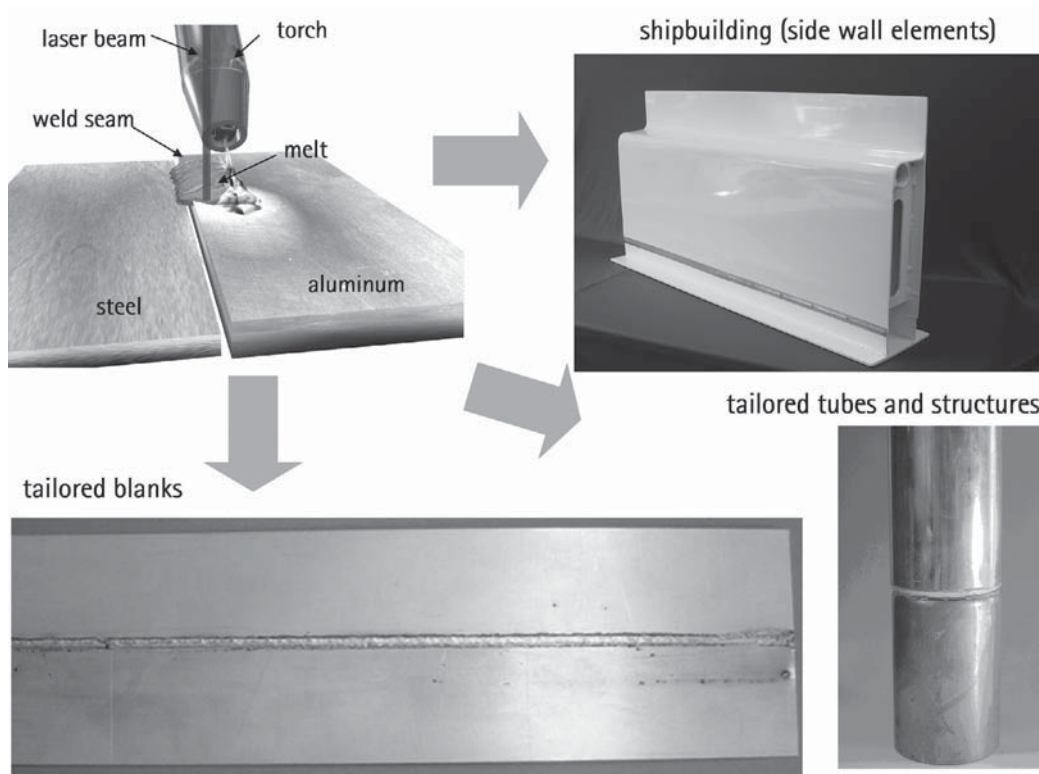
Process set-up and examples for hybrid welding of aluminium to steel [9, 10]
